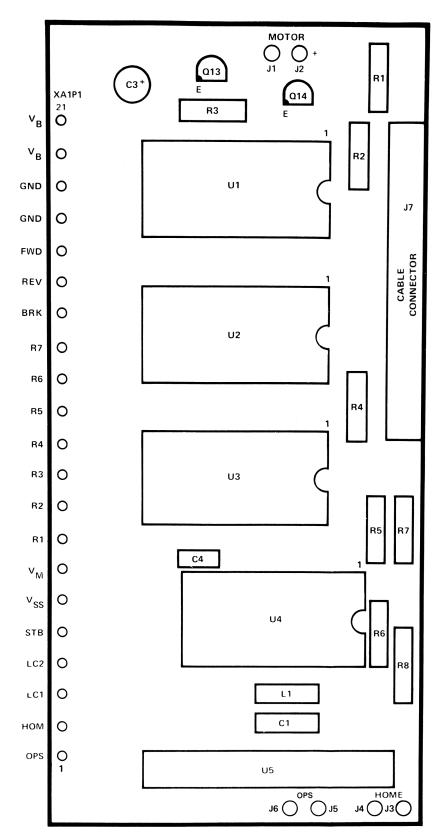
Printer PCA (A4A1) Component Location Diagram
